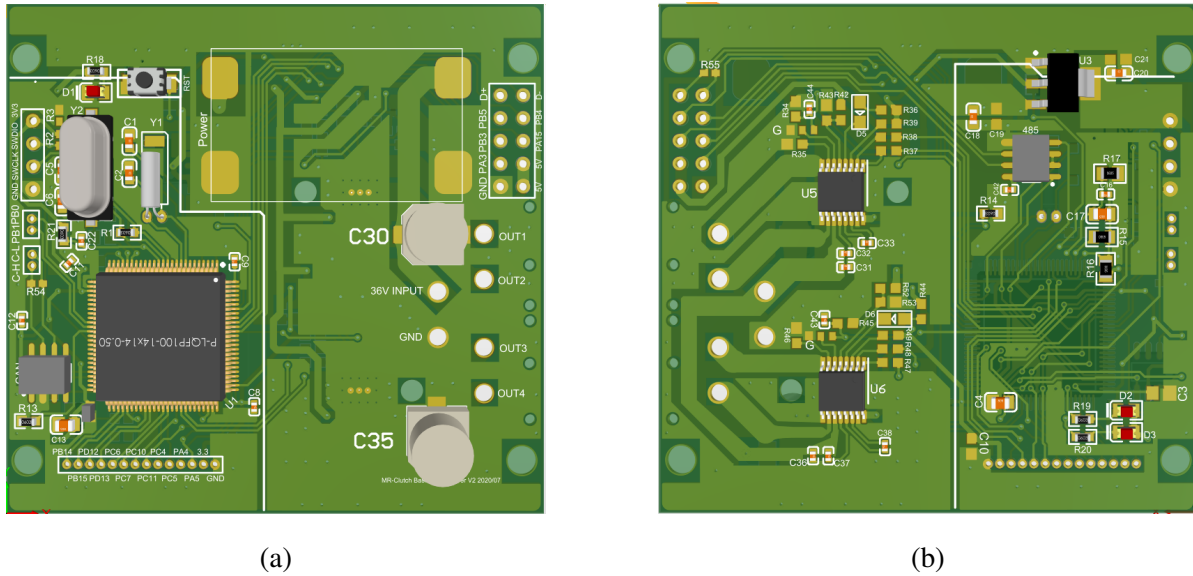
Three dimension view of the electronic driver; (a) Top layer, (b) Bottom layer.
